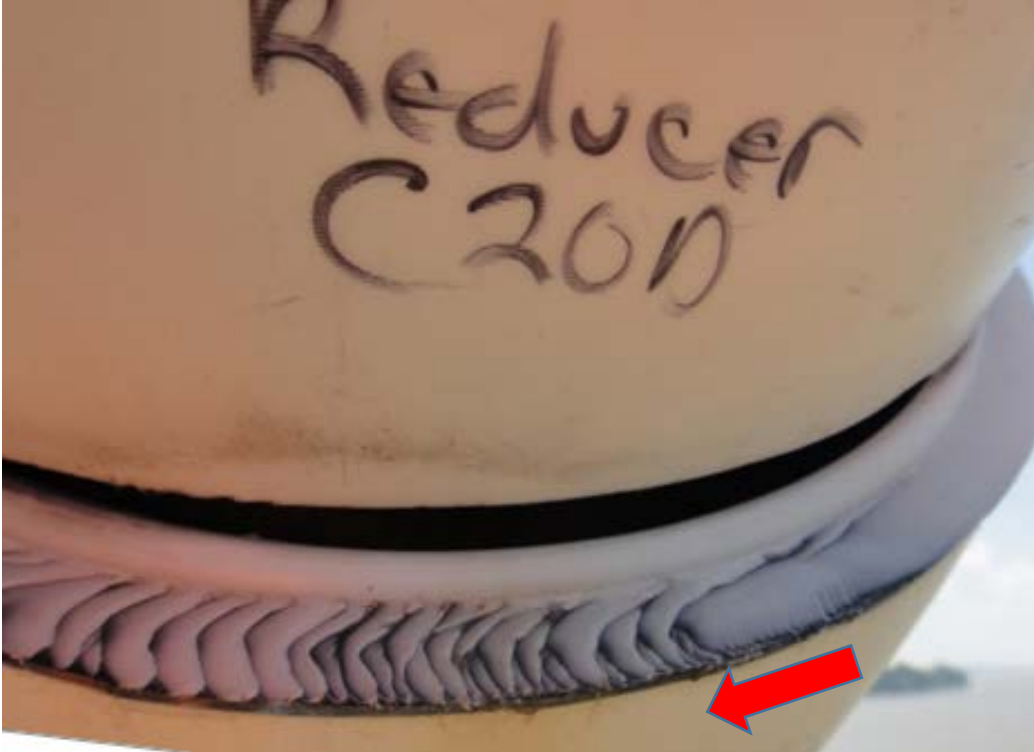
Fracture Surface Marks (Steps) Indicating Clockwise (Right- to- Left) Crack Growth Typical of Low-Cycle Fatigue Crack Propagation at Reducer-to-Connection Sleeve Pipe Butt Weld.
